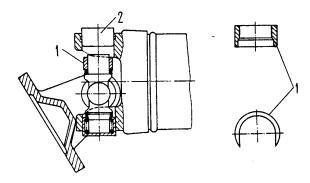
Mounting Bushing for Disassembling Universal Joint:
